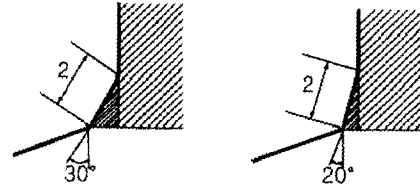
Schematic Illustration of Drilling Process when drill exits with chamfered drill.
